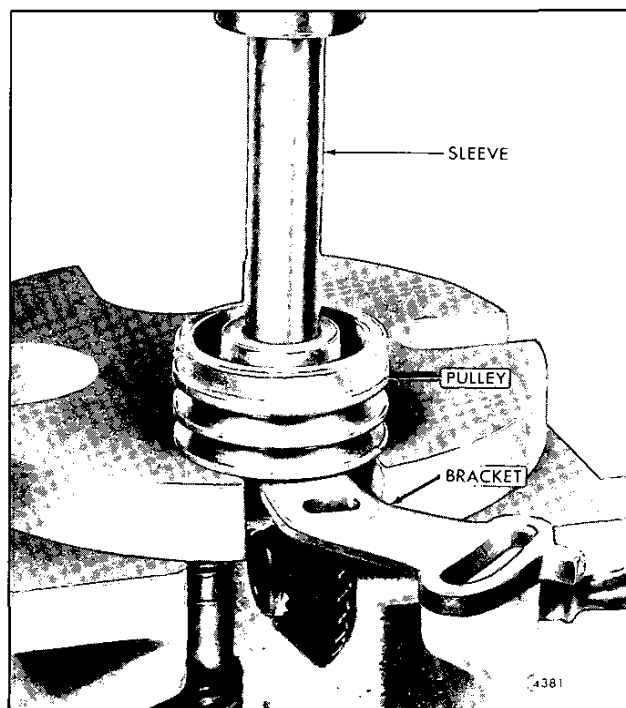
Removing Shaft and Bearing Assembly and Bracket from Idler Pulley
